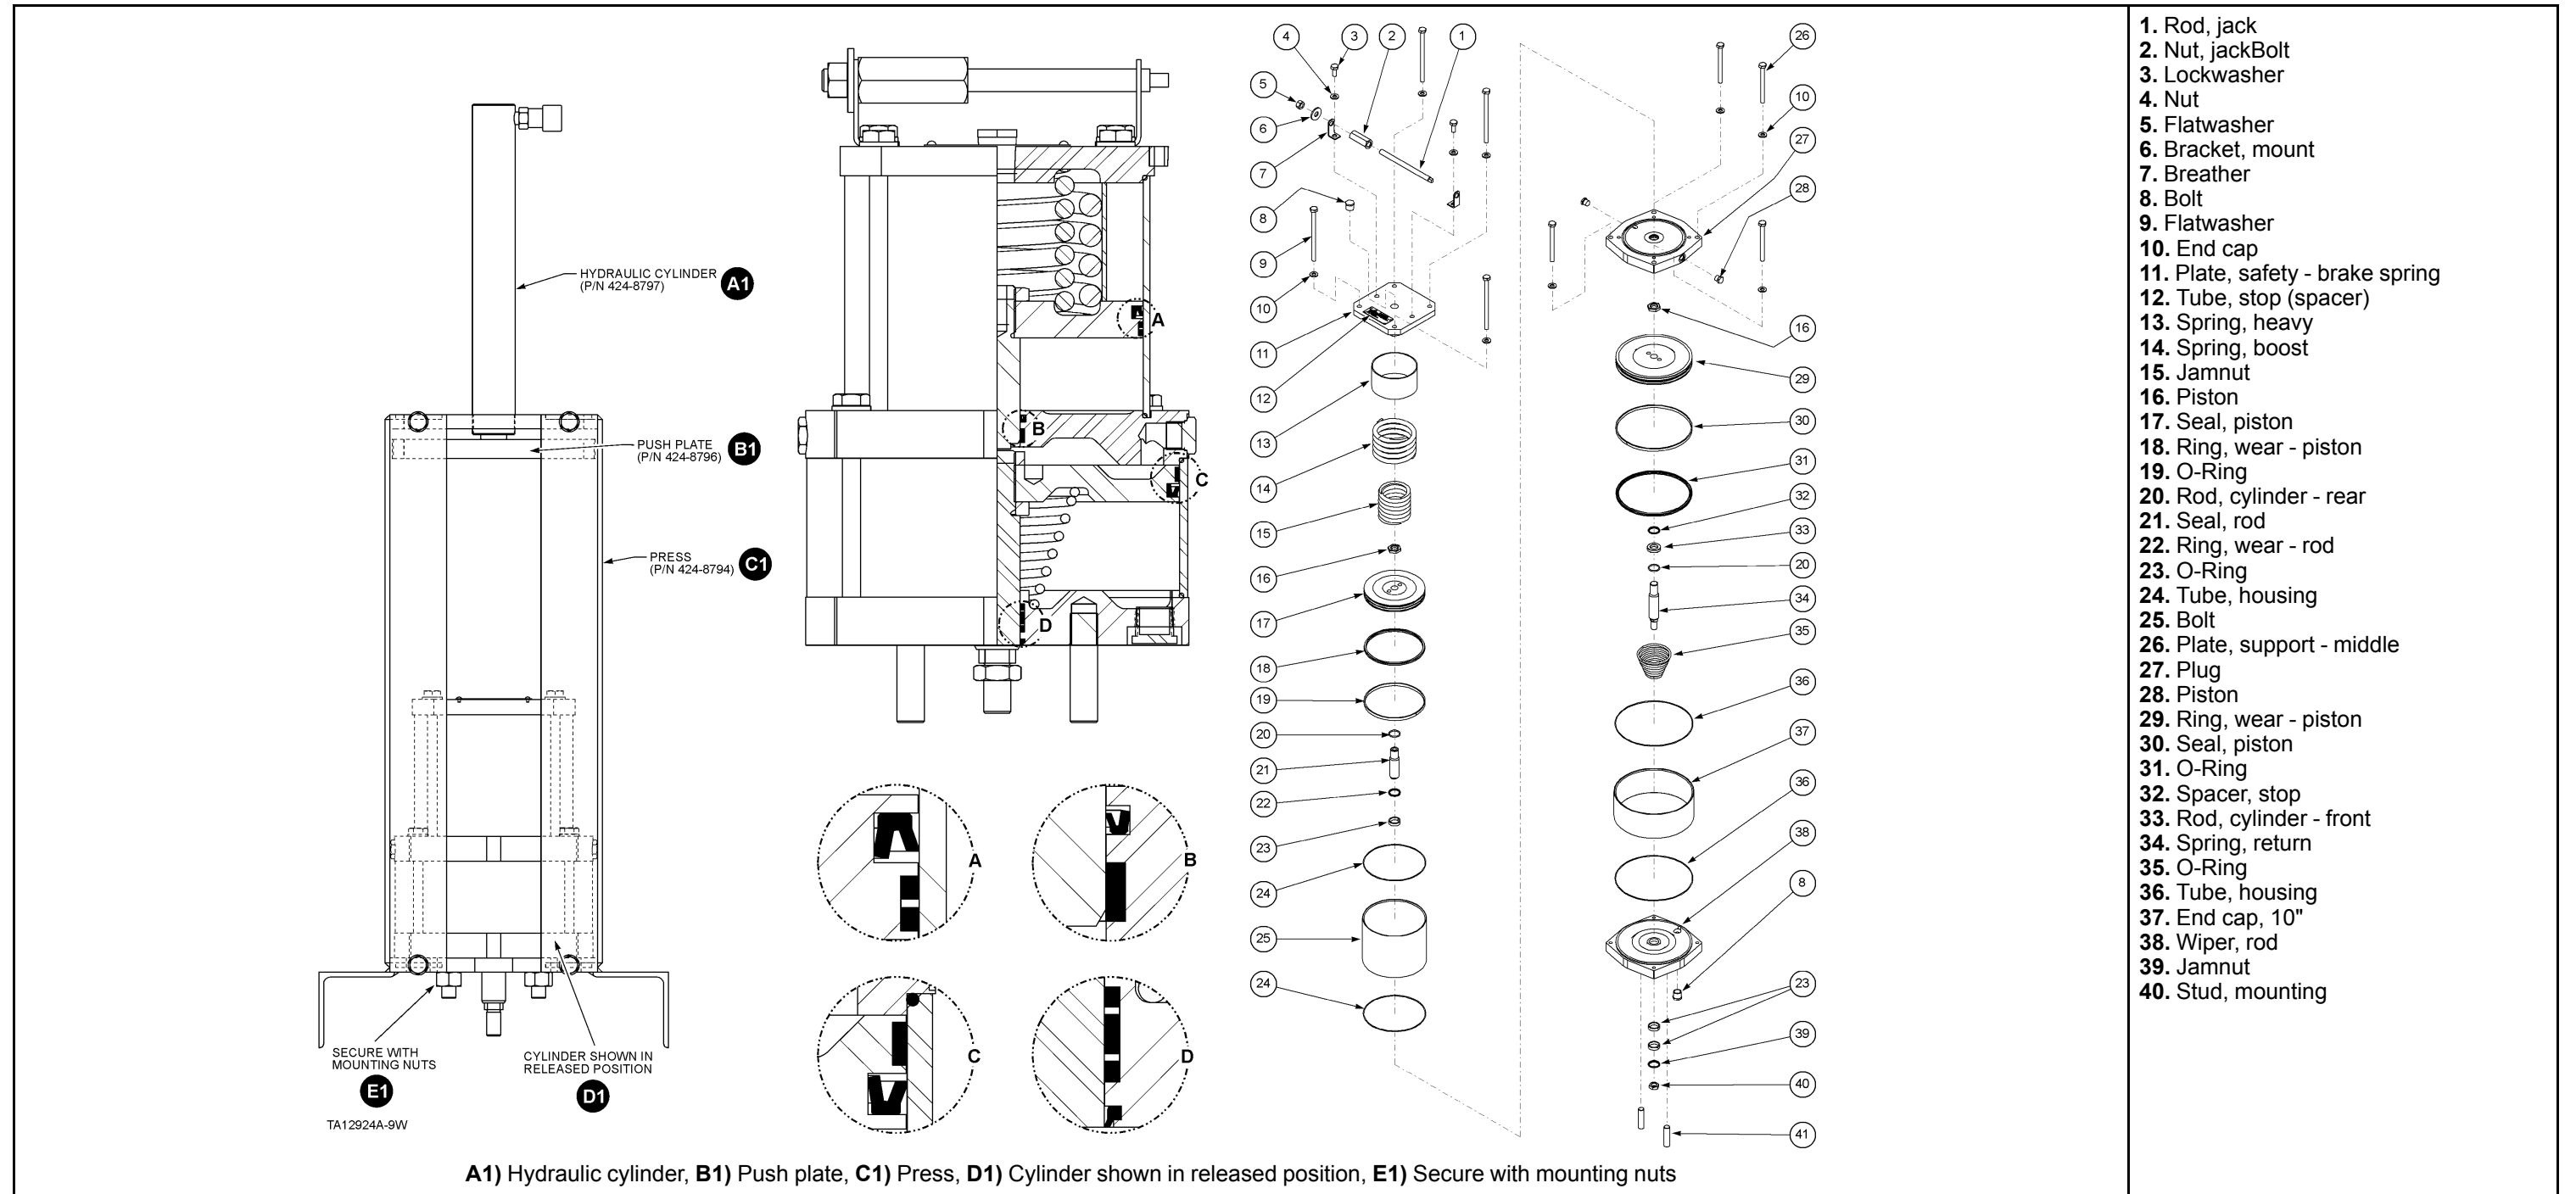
L-1350/L-1850/L-2350 brake cylinder assembly (2 of 2)
